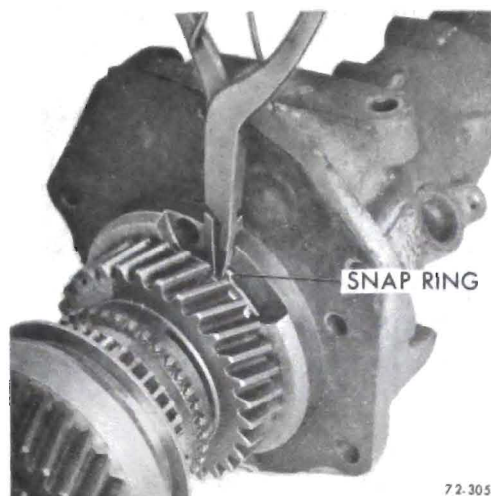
Removing Extension Housing to Rear Bearing Snap Ring
